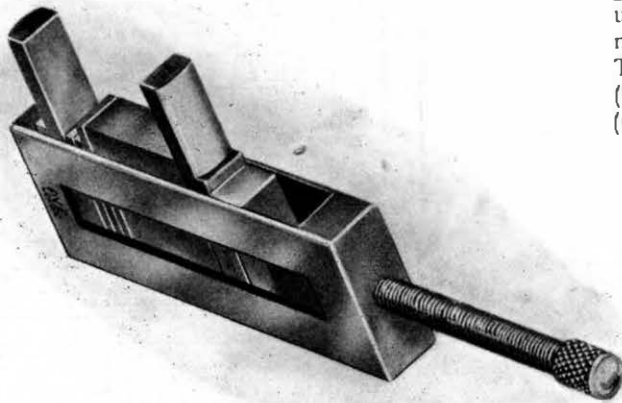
SLIPS AND JAWS ASSEMBLED IN HOLDER FOR INTERNAL OR EXTERNAL MEASUREMENT.
